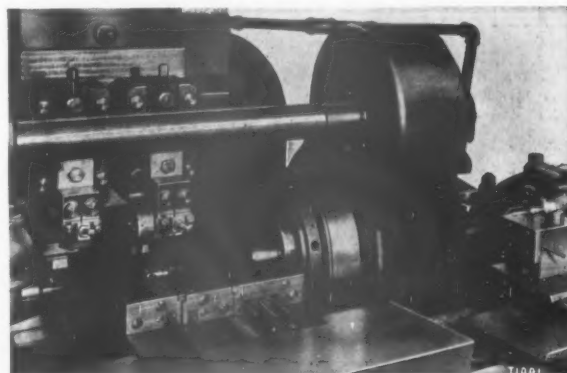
Close-up of center drive, overhead slide, and tooling for turning axle shafts.
